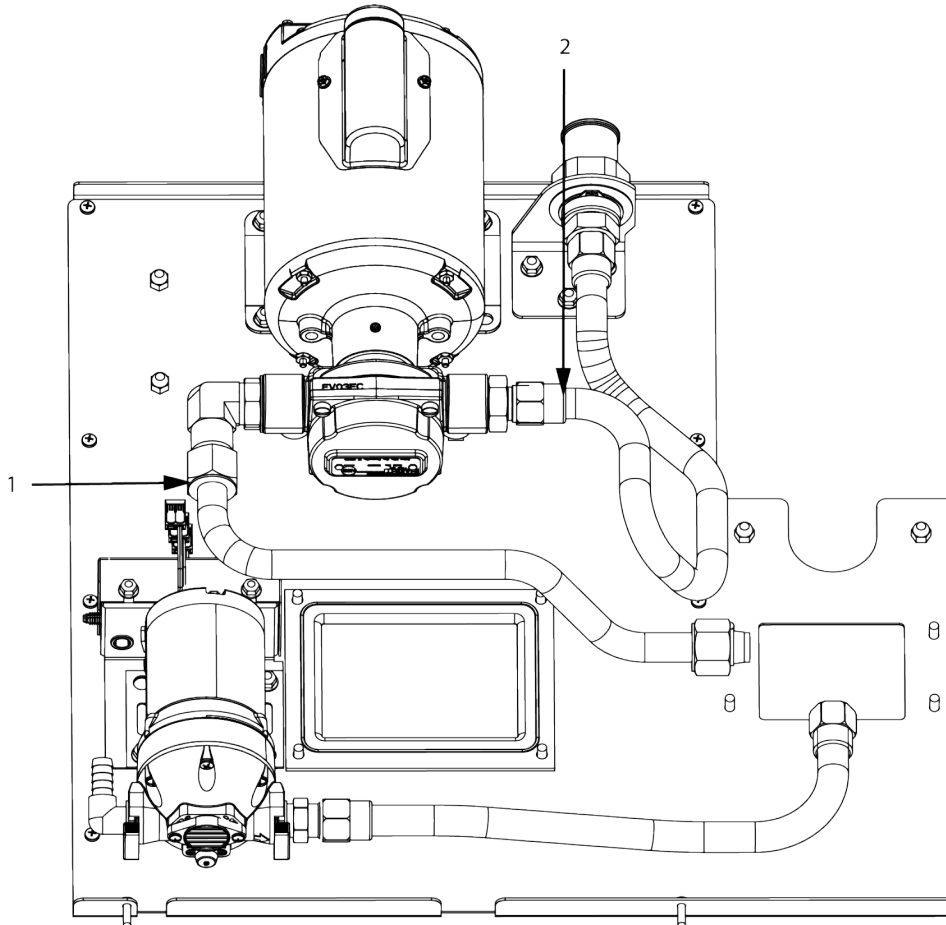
SAE Fittings on Hubmounted Filter Pump and Motor
